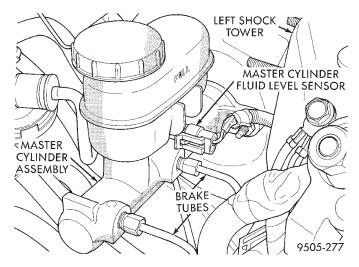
Master Cylinder Brake Fluid Level Sensor
